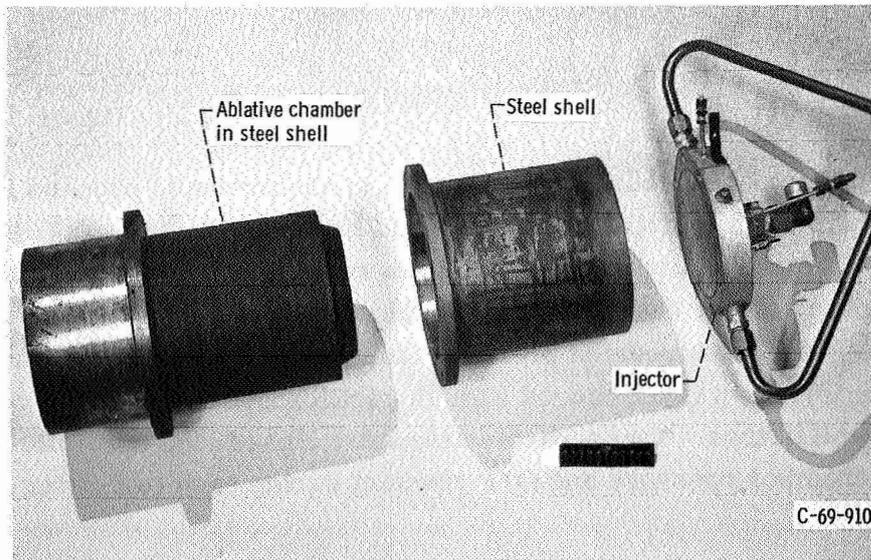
1000-Pound (4450-N) thrust ablative engine assembly.
